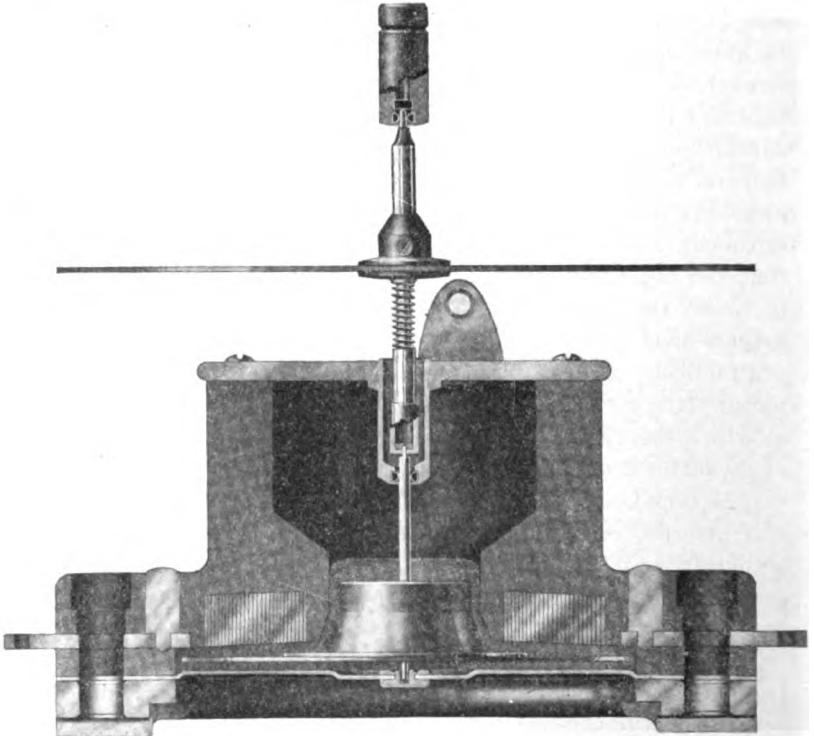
Cross-Sectional View of Sangamo Meter.
